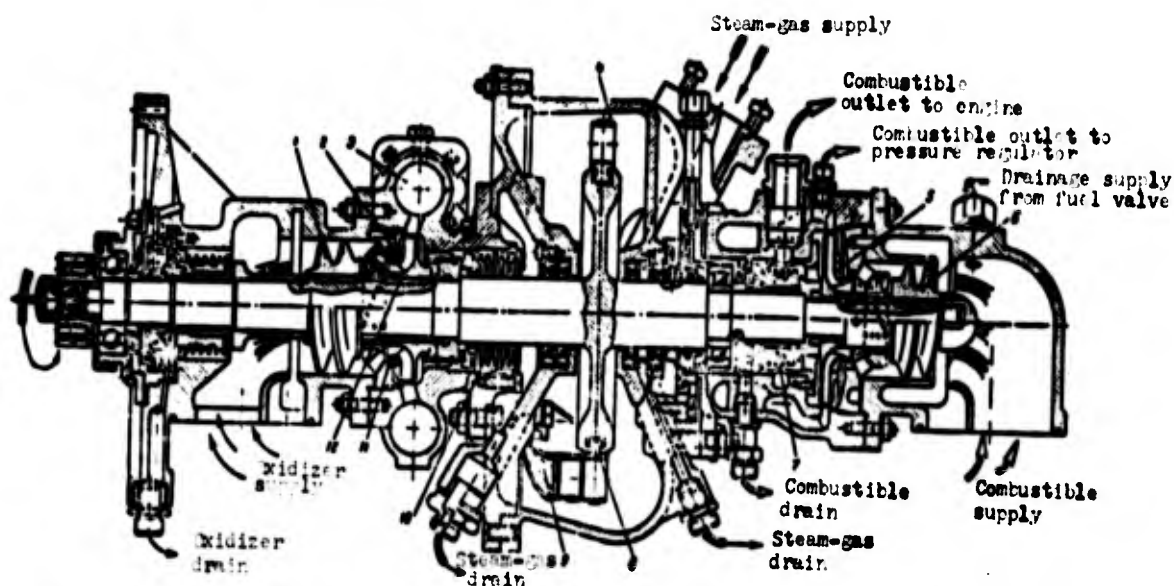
Diagram of a turbopump assembly with assembled impellers: 1, 6 - worm screws; 2, 5 - removable rings of covers of closed pump impellers; 3 - spiral oxidizer header; 4 - banding of turbine blades; 7, 10 - face seal; 8 - turbine blade; 9 - gas header of the turbine; 11 - slit gasket; 12 - key.
